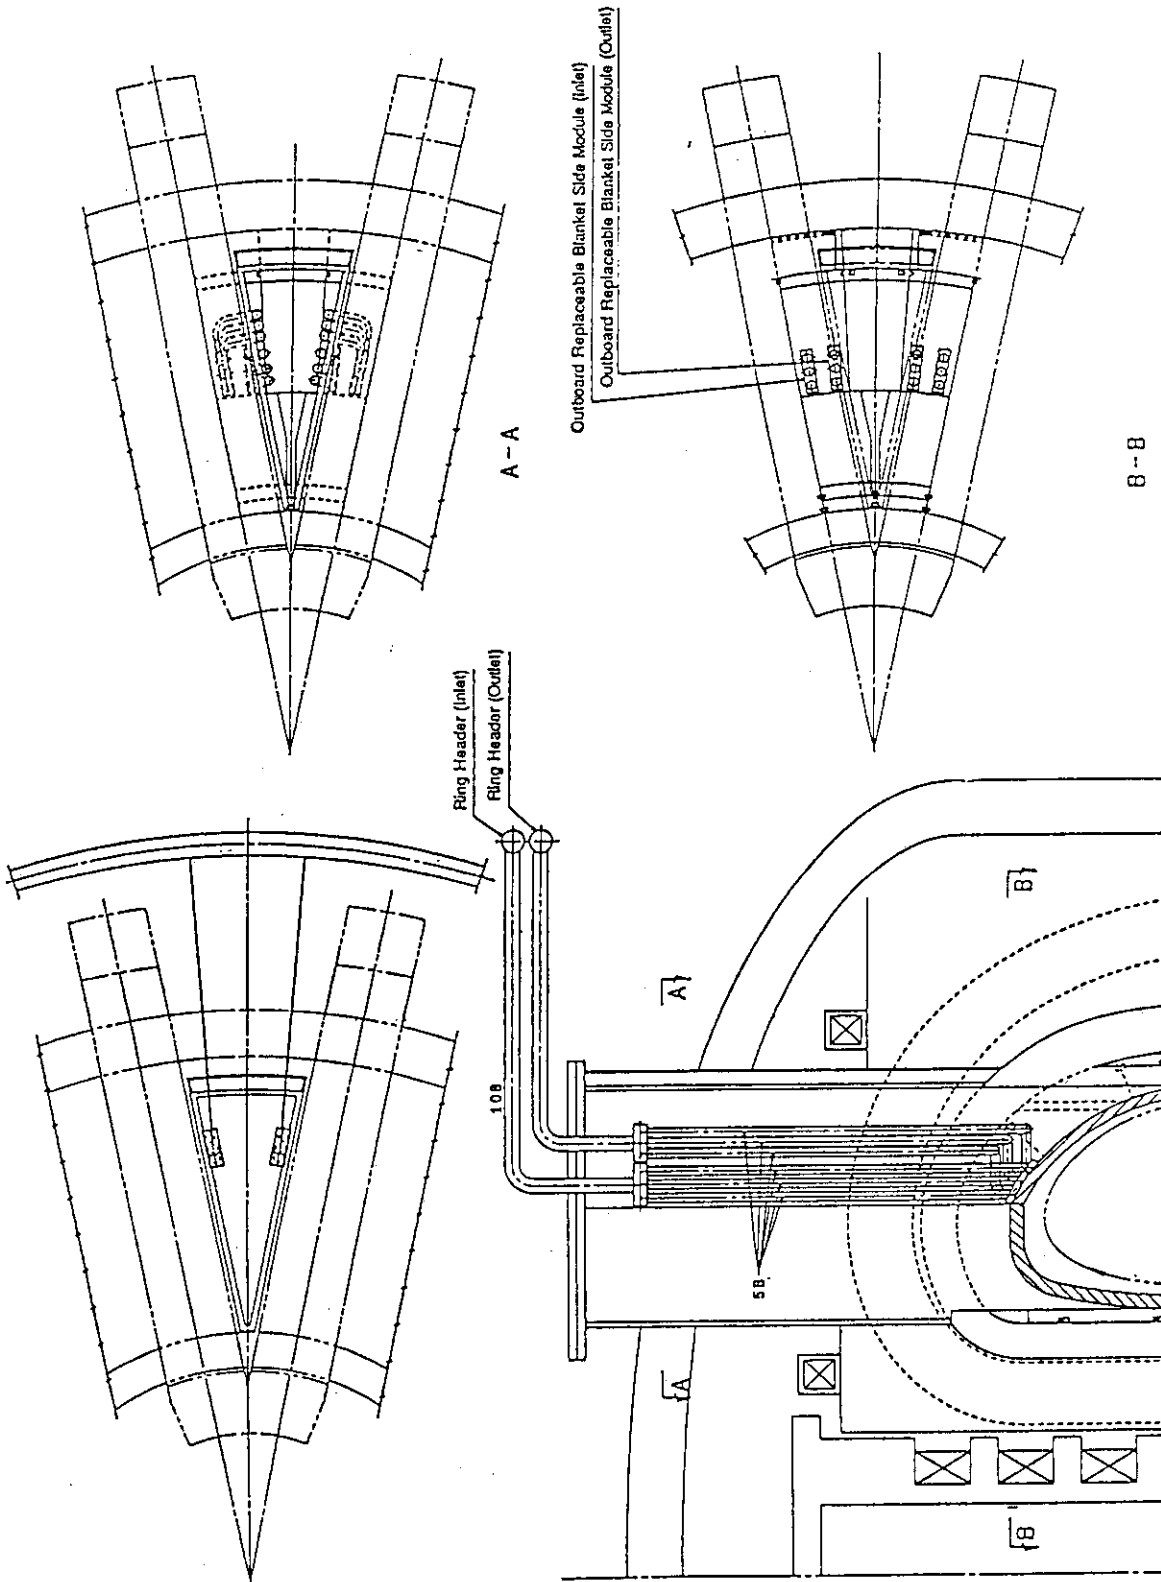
Coolant pipe arrangement for outboard replaceable side module.
